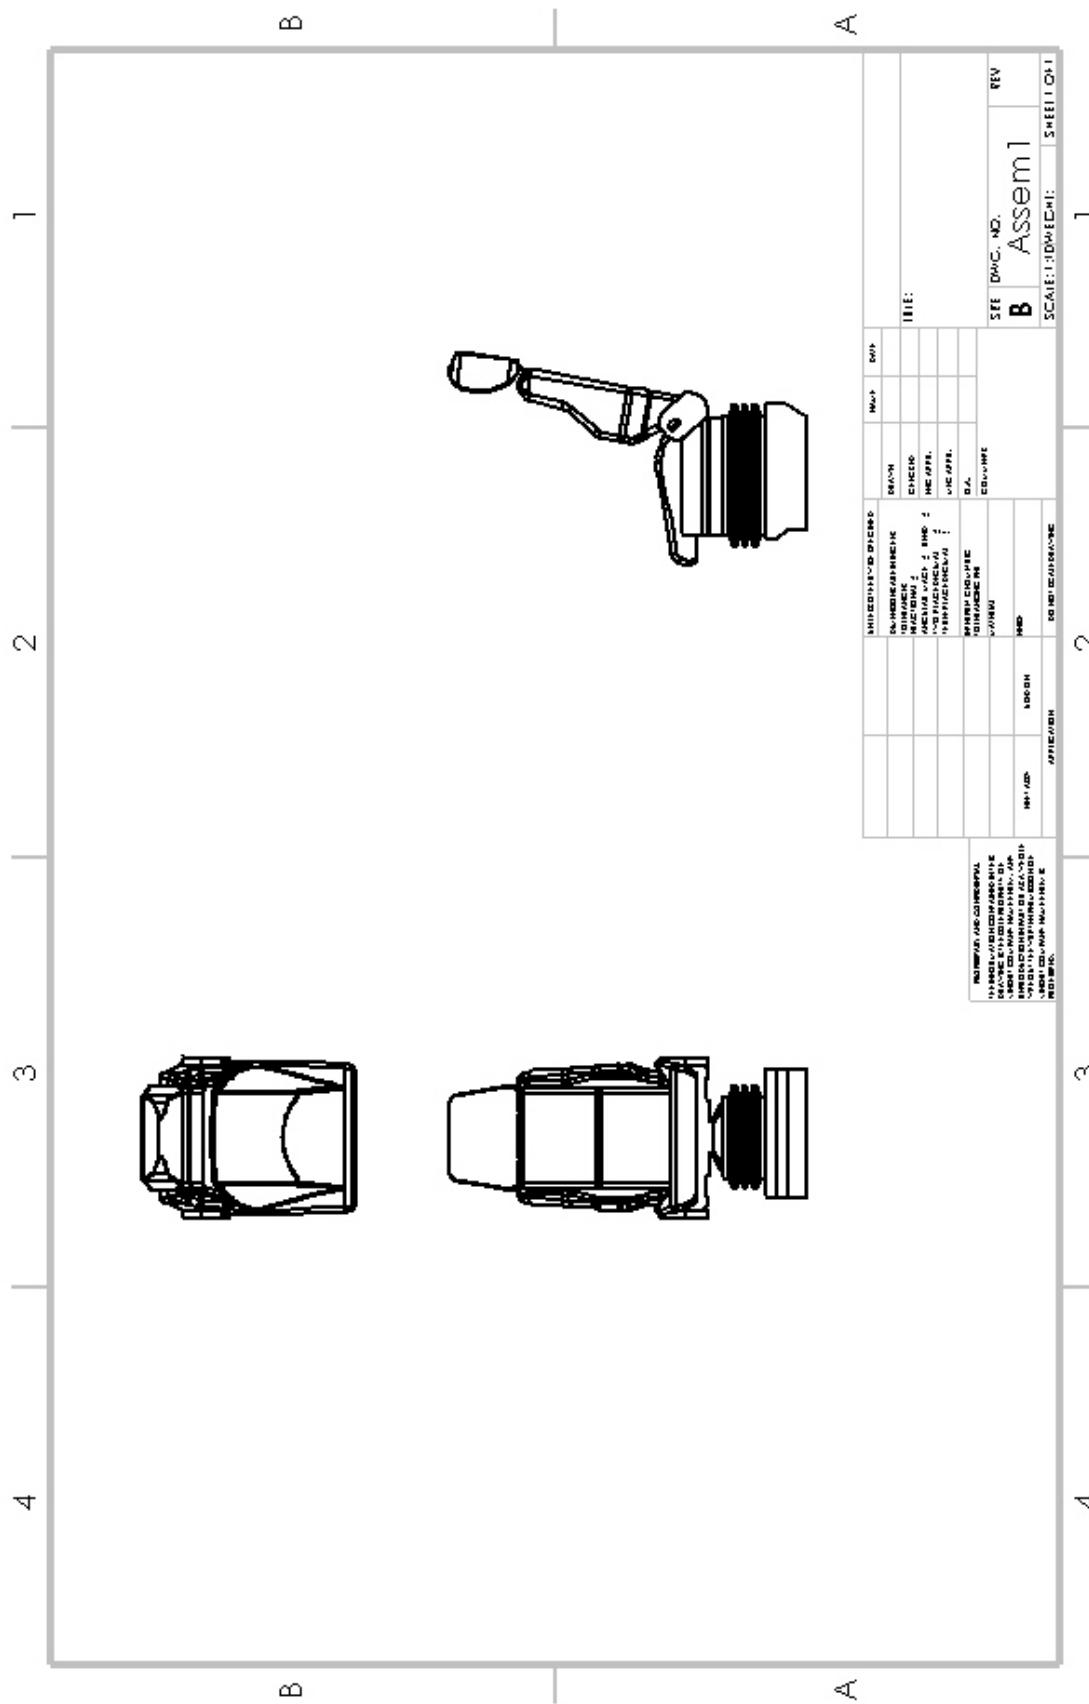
Kumar, Vishakh: Seat Full Assembly
